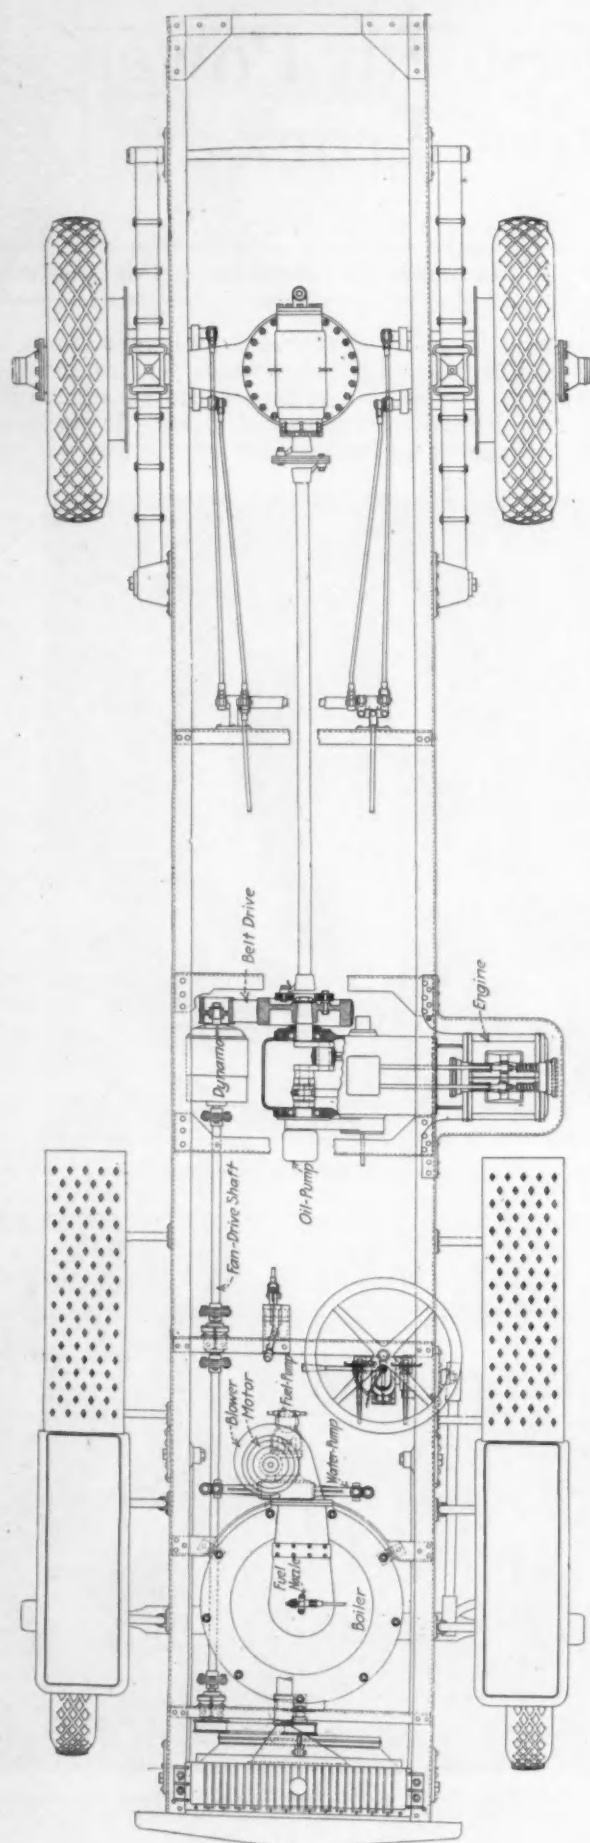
PLAN VIEW OF THE COMPLETE TRUCK SHOWING THE LOCATION OF THE CRANKSHAFT, THE DRIVE-SHAFT AND THE DYNAMO
